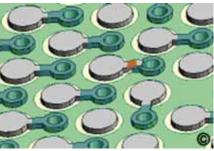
Scrape solder off a small length of connecting circuit exposing the copper.
